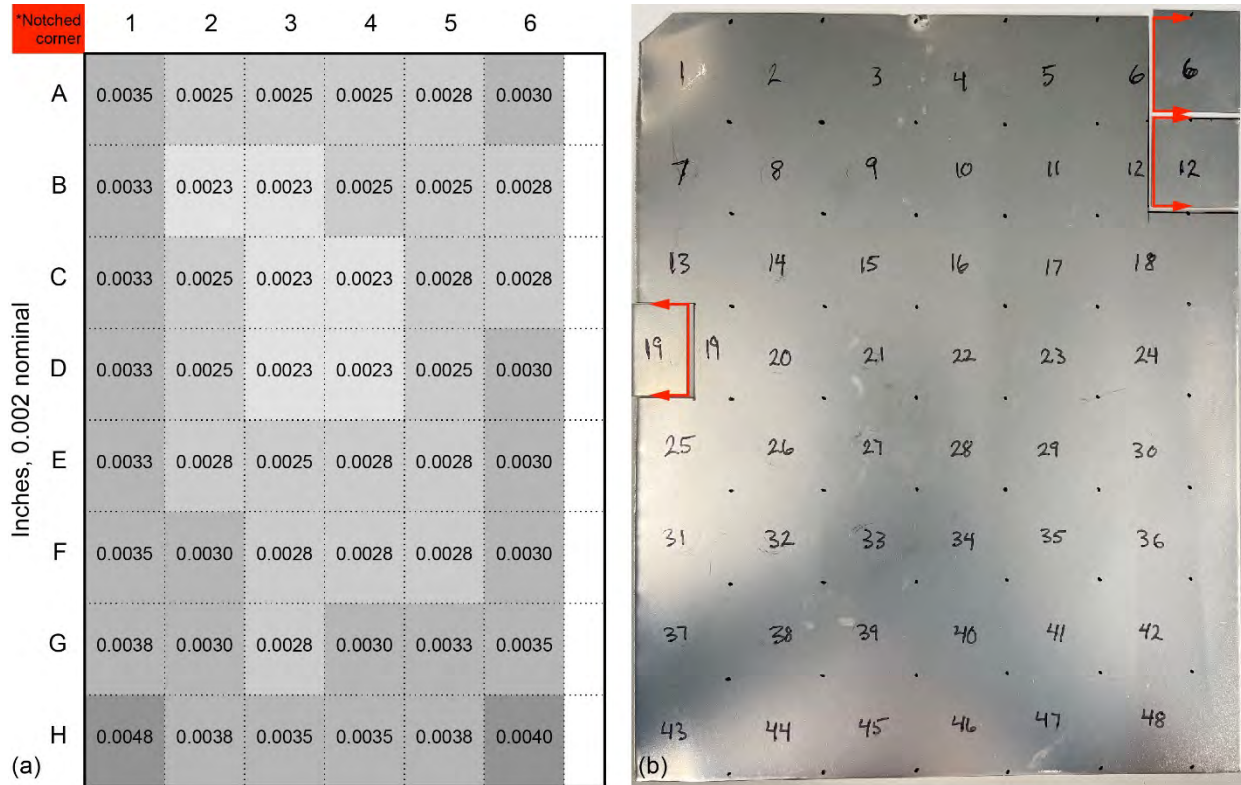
Flat electroplated sheet (Ref. 9). (a) Test matrix. (b) Physical marked plate.
